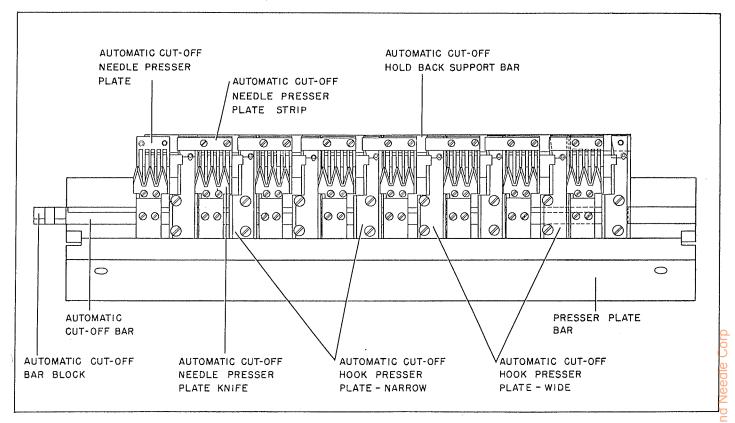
Automatic Cut-Off Presser Plate Bar Assembly
